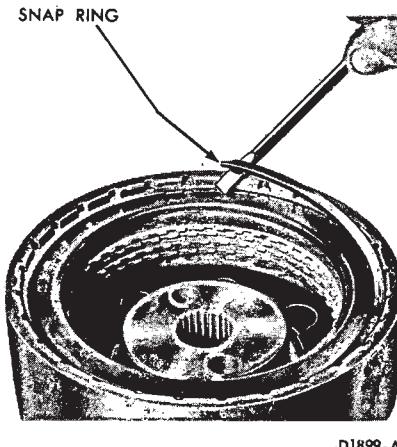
Removing Forward Clutch Pressure Plate Snap Ring
